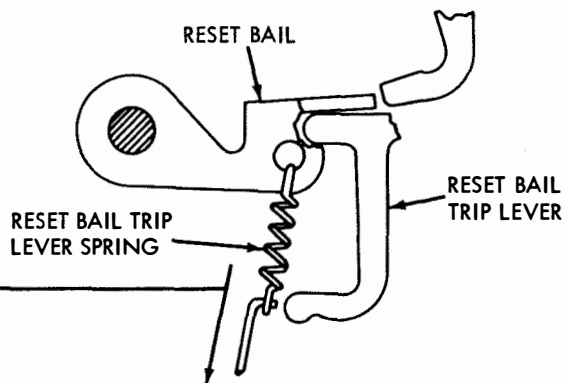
Blank Tape Feed-Out Mechanism (Not Applicable to TT-192A/UG and TT-253A/UG)
